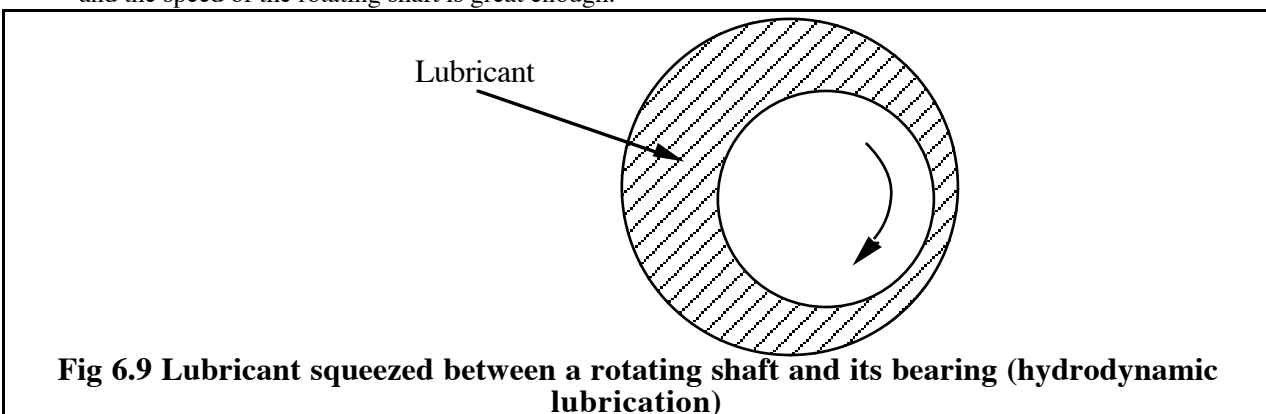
Lubricant squeezed between a rotating shaft and its bearing (hydrodynamic lubrication)
